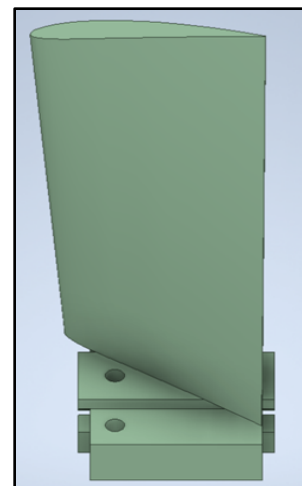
3D Steam Turbine Blade Design using a NACA 4412 aerofoil
